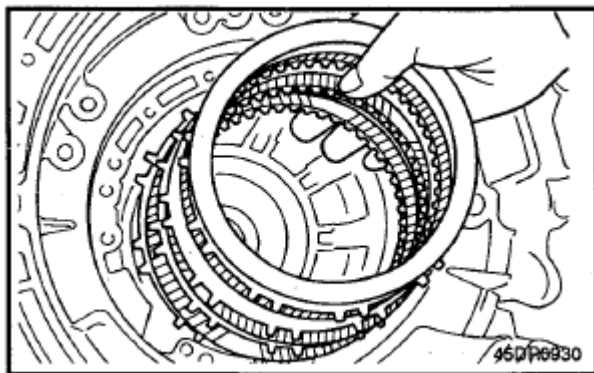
Identifying Wave Spring, Return Spring, Reaction Plate, Brake Disc, & Brake Plate
